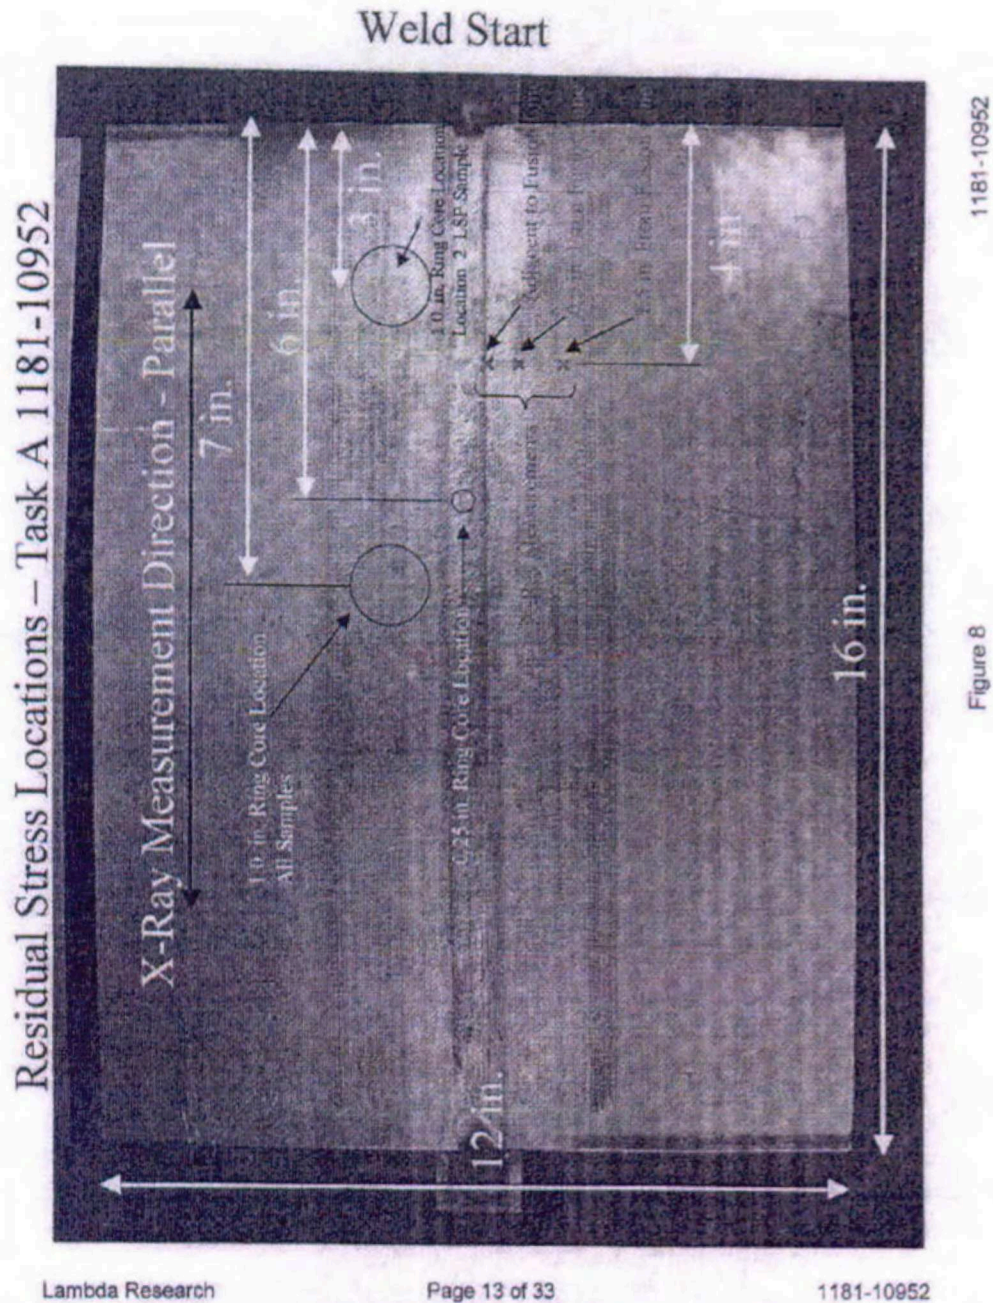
Measurements Parallel to the Weld Line on Alloy 22 CPB Processed 1" Weld Plate
